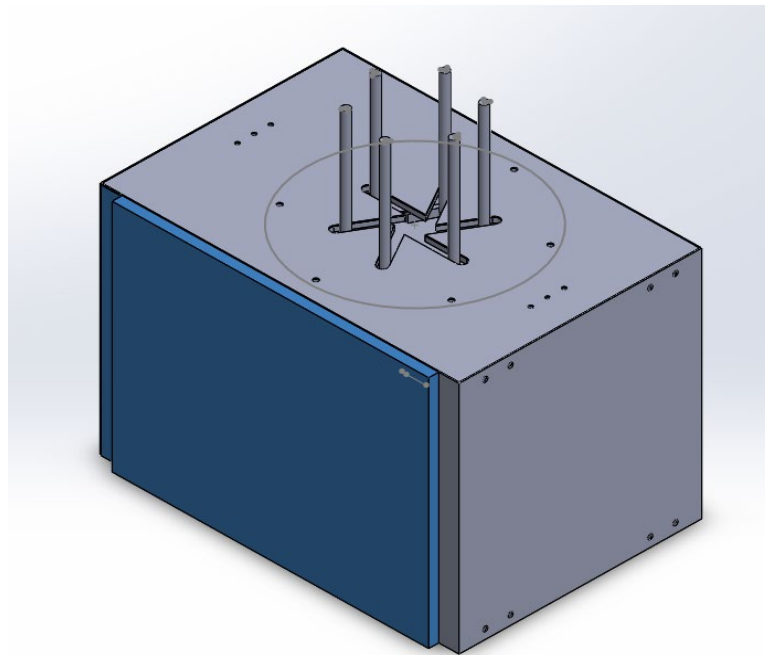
Automatic finger extensor machine based on iris mechanism with a casing.
